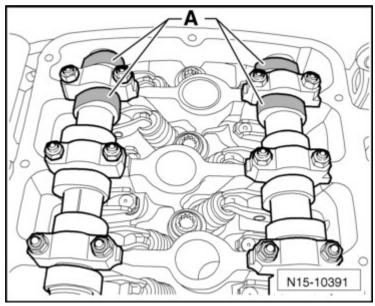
Camshaft Lobes For Cylinder Facing Each Other Courtesy of AUDI OF AMERICA, LLC
